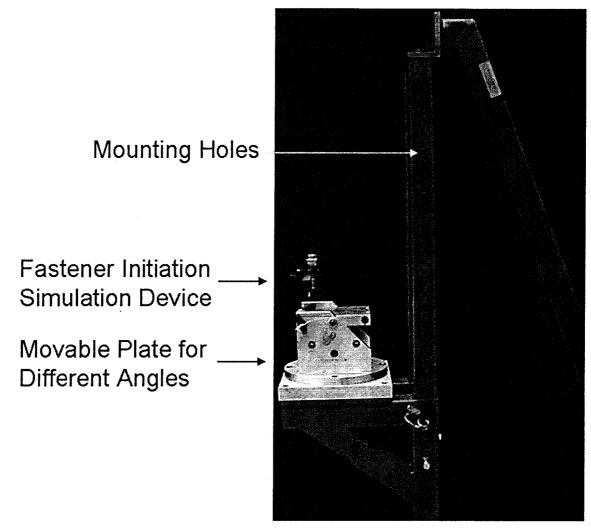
The adjustable jig structure which houses the fastener initiation device. Mounting holes allowed for adjustments for height.
